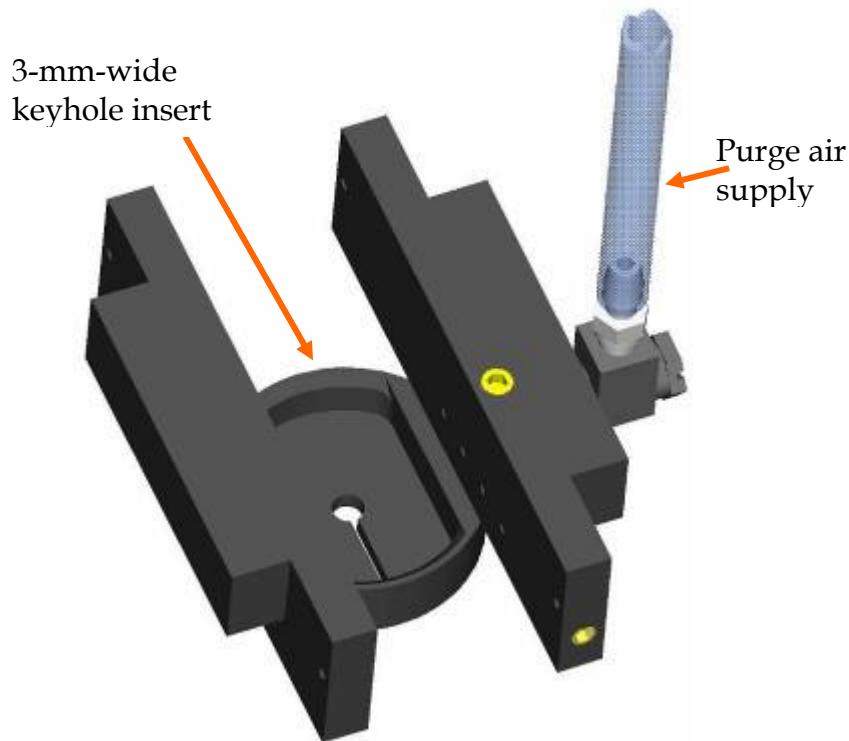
Z-sensor module purge arrangement. The laser fits between the two side pieces and over the circular coil-form insert
